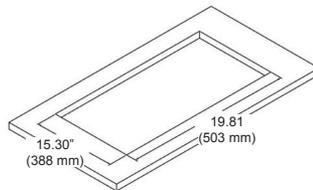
Apogee Single Burner Drop-in Cutout Dimensions
